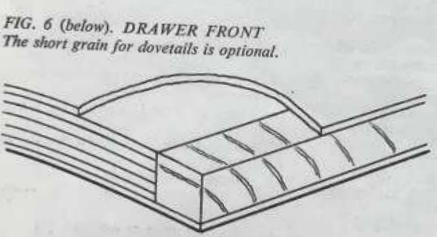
(below). DRAWER FRONT. The short grain for dovetails is optional.
